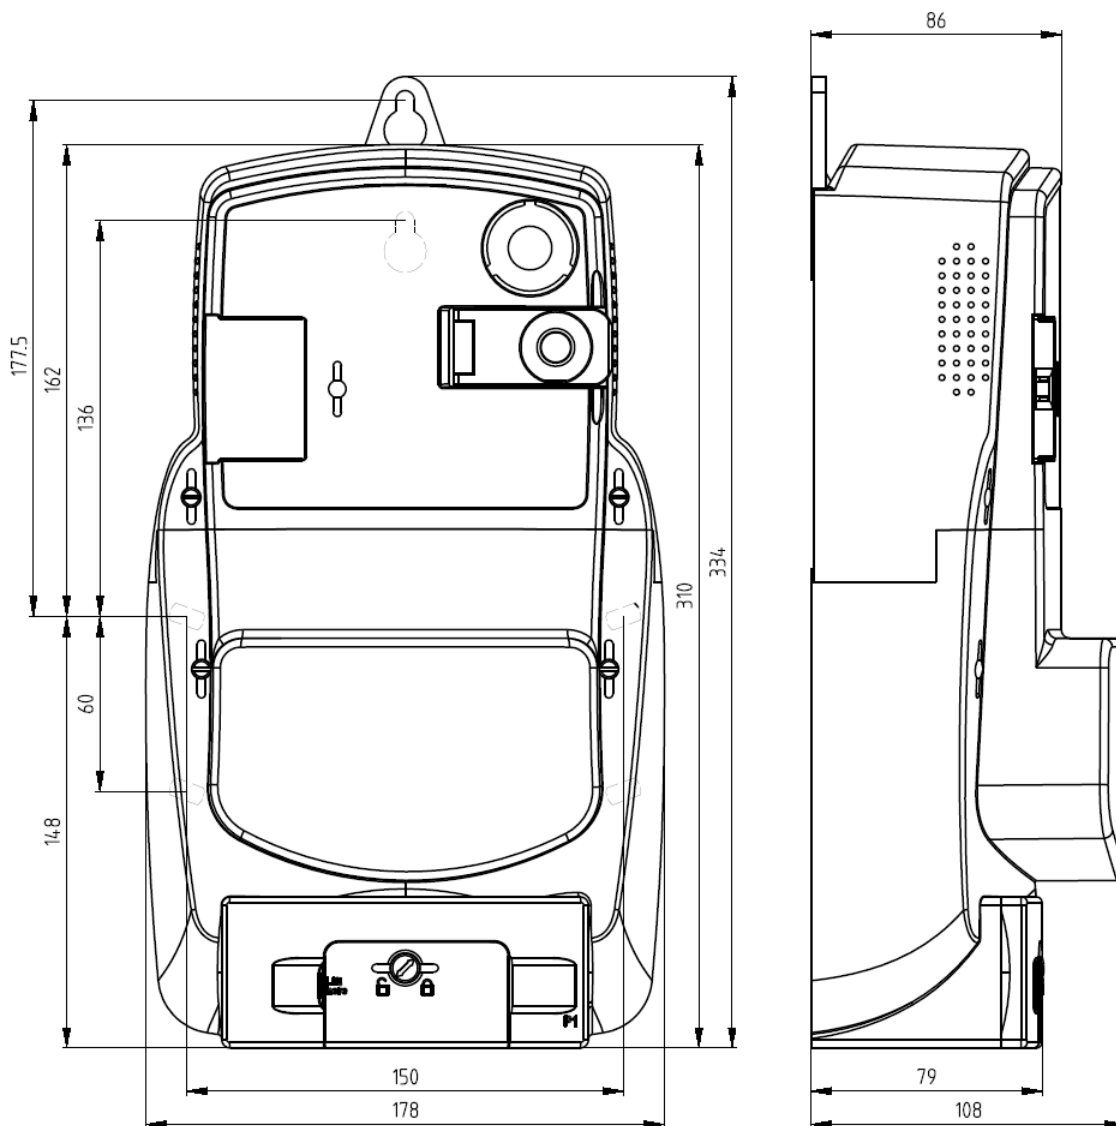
Overall and fixing dimensions of the MT382 meter fitted with a P1+M-Bus+SD terminal cover
